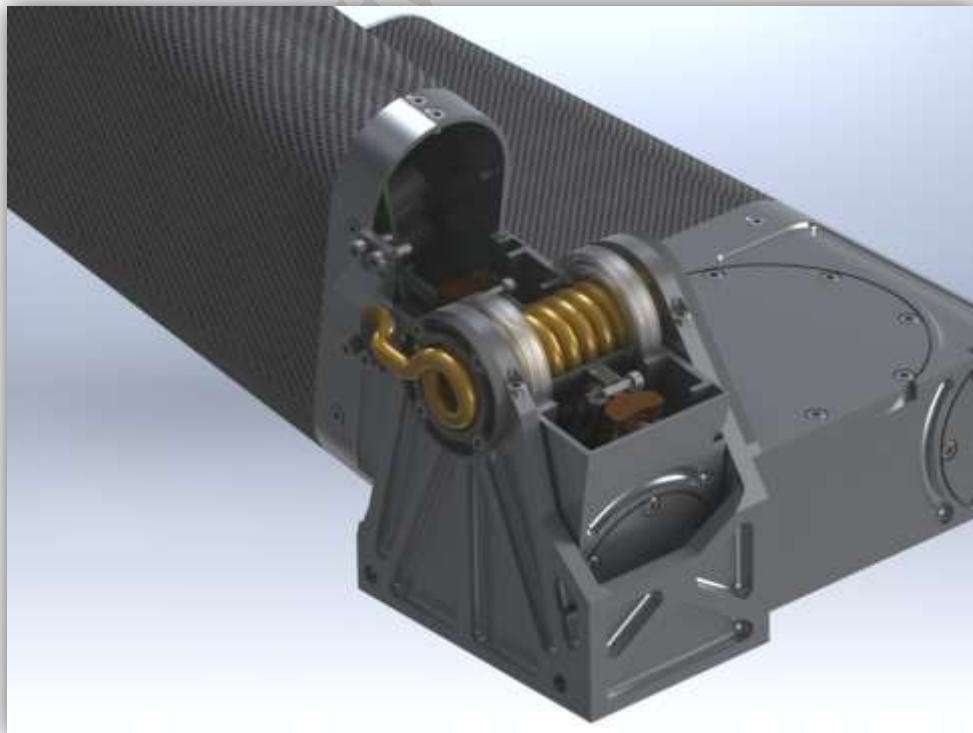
Figure V: Render of Bottom of Arm with Cutaway showing Torsion Spring
